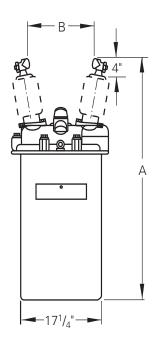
Dimensions of Types WE, VWE, WVE27, and VWVE27 reclosers with and without the bushing current transformer accessory.
